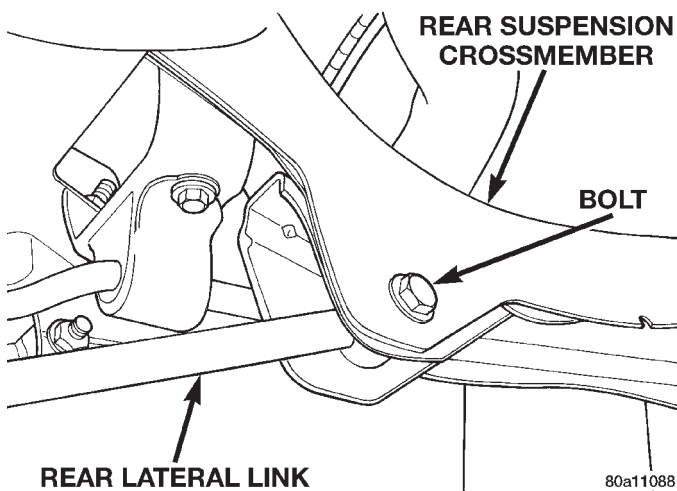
Lateral Link Attachment To Rear Suspension Crossmember
